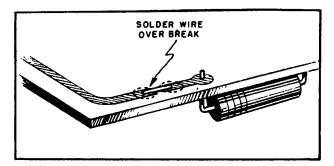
Method for repairing a break in printed-circuit conductor. Solder a small piece of tinned wire right over the break.
